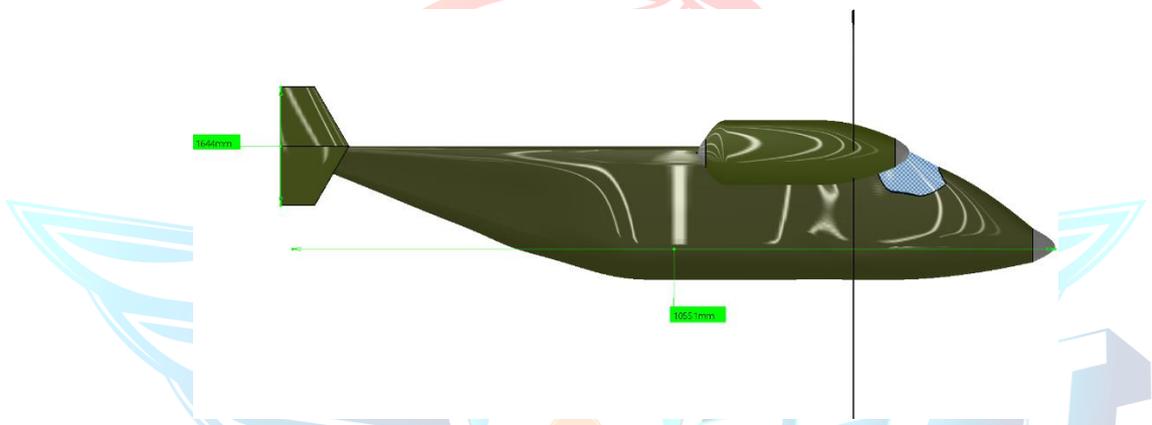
Dimensions of the Helicopter HB-1. (Left View)
